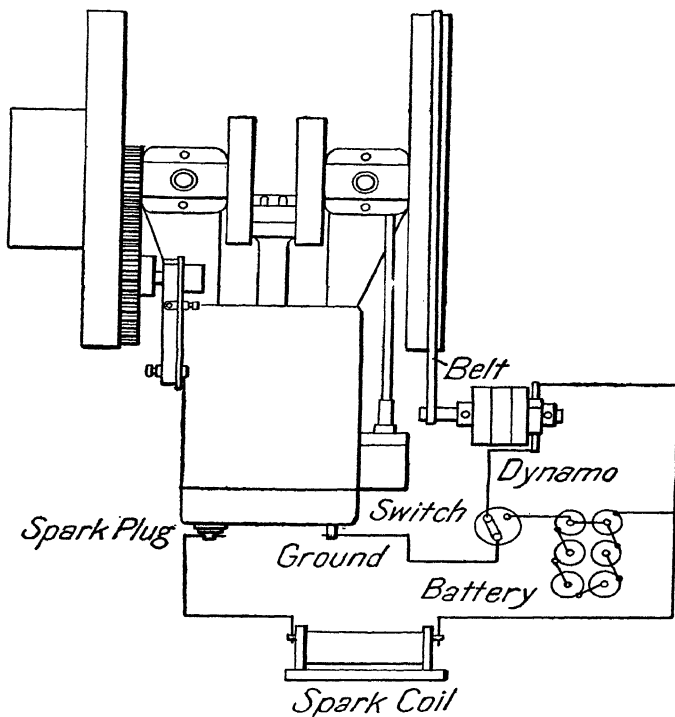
WIRING DYNAMO OR MAGNETO FOR MAKE-AND-BREAK IGNITION.
